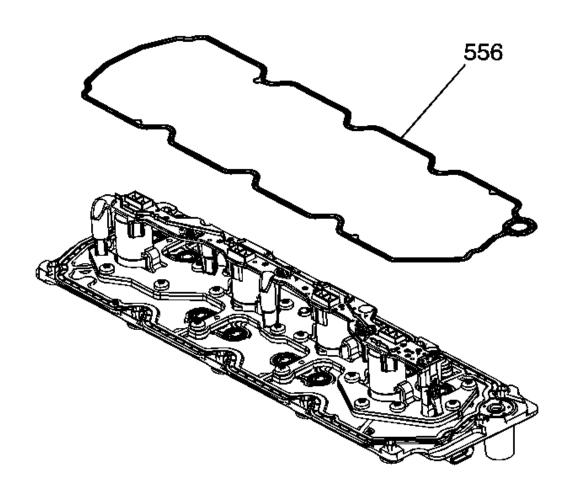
View Of Outer Gasket Courtesy of GENERAL MOTORS CORP.
